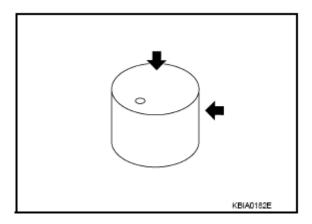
Locating Surface Of Valve Lifter Courtesy of NISSAN NORTH AMERICA, INC.
